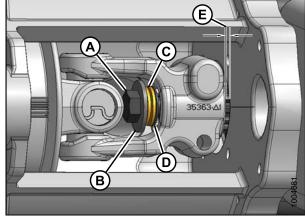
E - minimum clearance 0.060 in. (1.5 mm)
